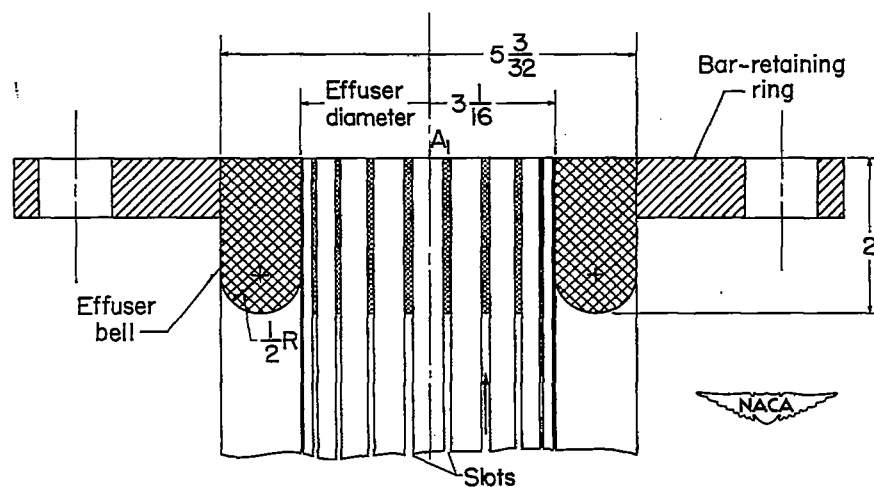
Slotted-throat test section enclosed in chamber. All dimensions are in inches.
